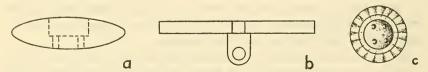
a, Cross section of milk-white glass button showing well and holes for attachment. b, Pearl-and-brass button showing cross section. c, Details of surface treatment.
